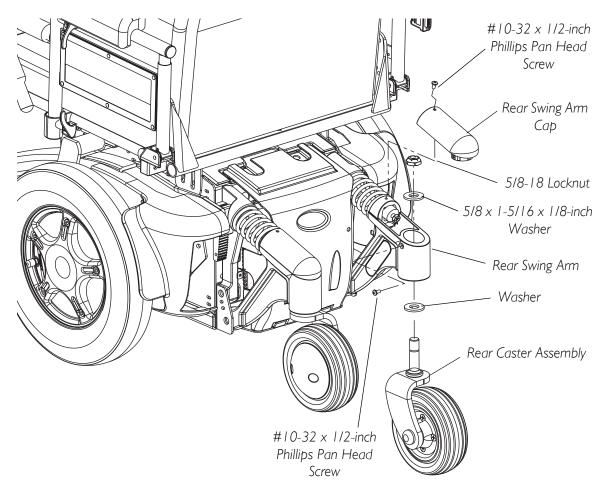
REMOVING/INSTALLING THE REAR CASTER ASSEMBLY
